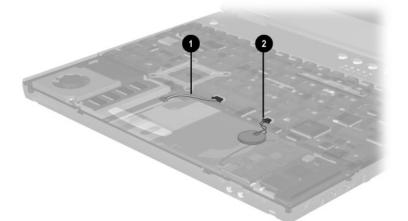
Routing the RTC Battery and TouchPad Cables
